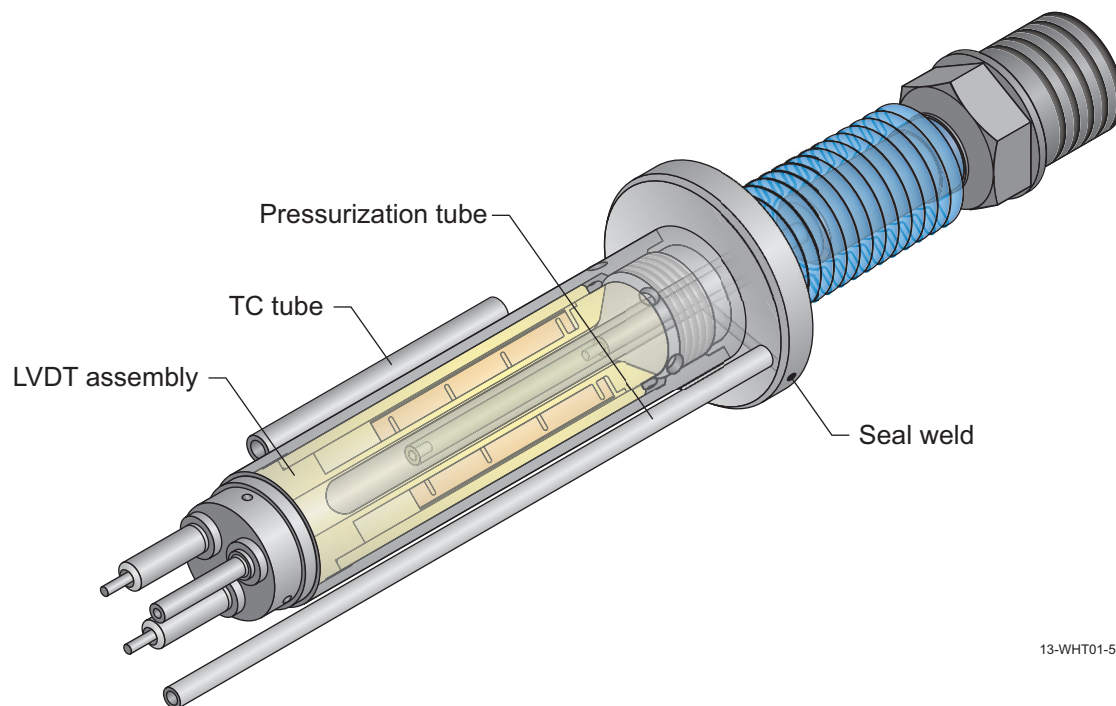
The probe assembly (laser welding was used to attach the core to the upper adaptor, the bellows to the upper adaptor and end plug and the pressurization tube to the end plug).
